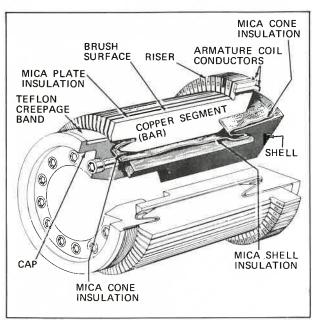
CUTAWAY SECTION OF THE COMMUTATOR.
